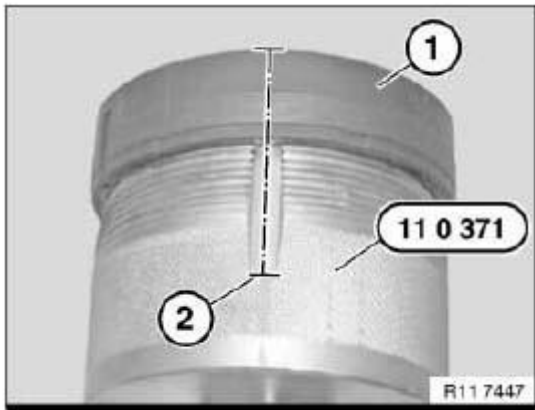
Identifying Crankshaft Radial Seal And Cutting Line
